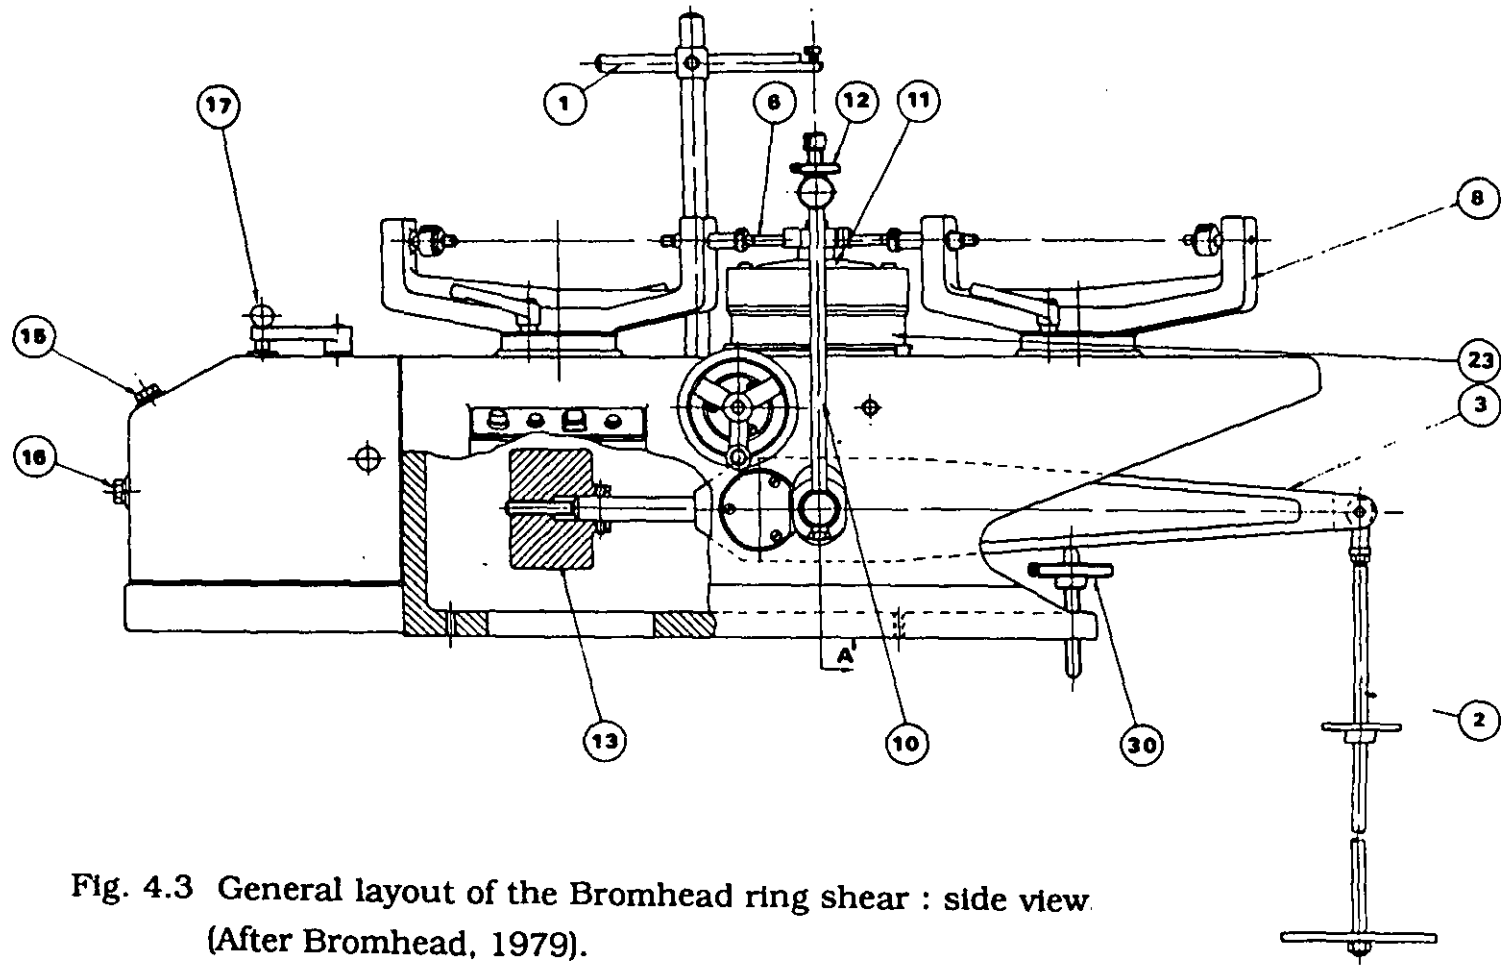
General layout of the Bromhead ring shear : side view.
